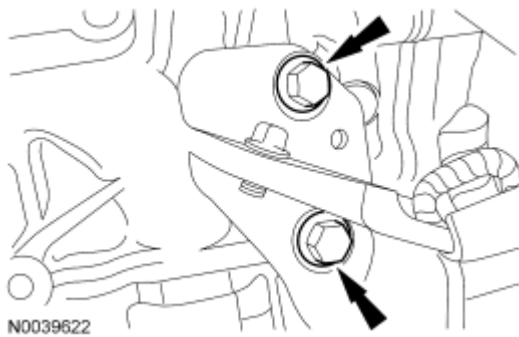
Locating RH Halfshaft Carrier Bearing Bracket Bolts
